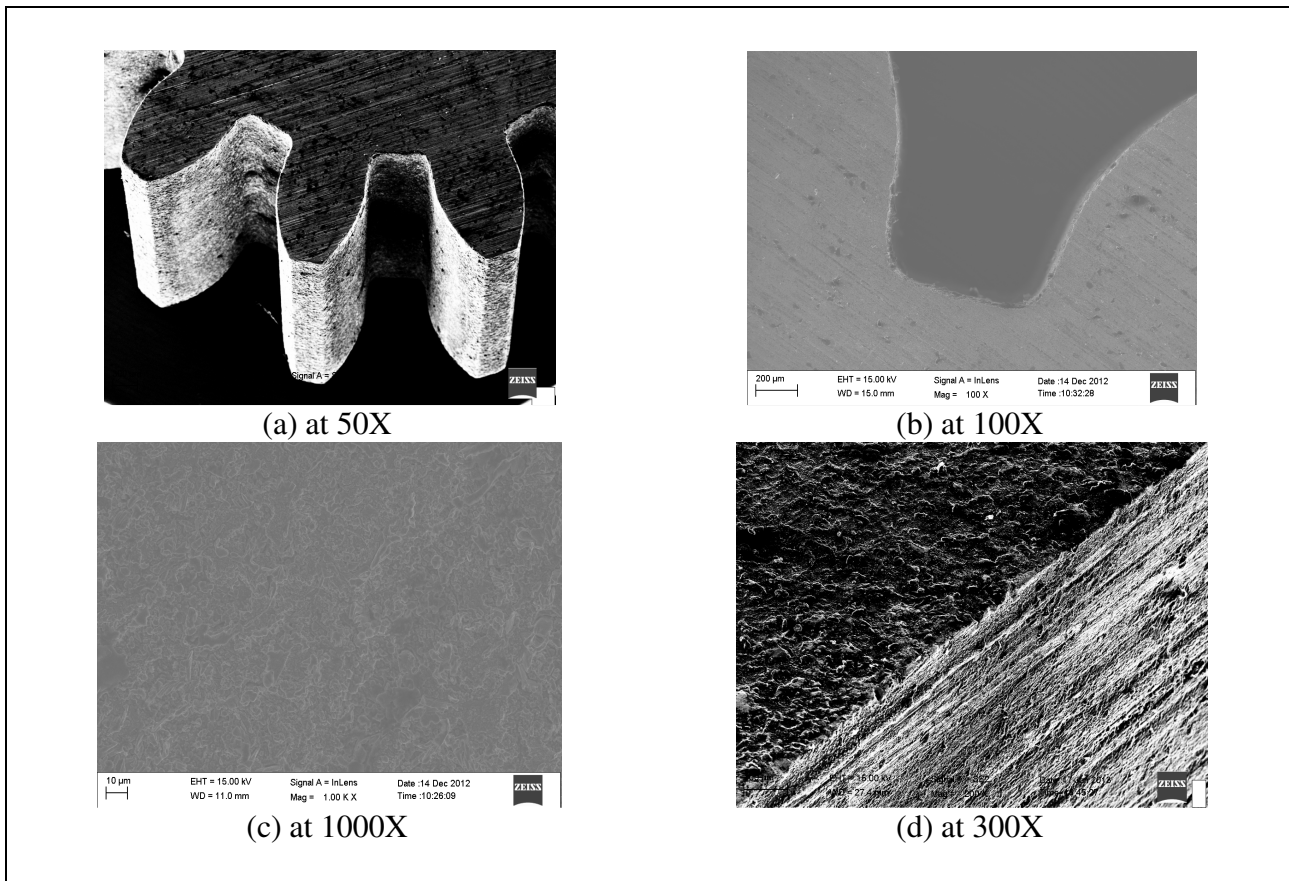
SEM images (a) and (b) proturbance-free gear teeth profile; (c) smooth crack-free texture of the best tooth surface; (d) uniform distribution of regular craters on tooth surface
